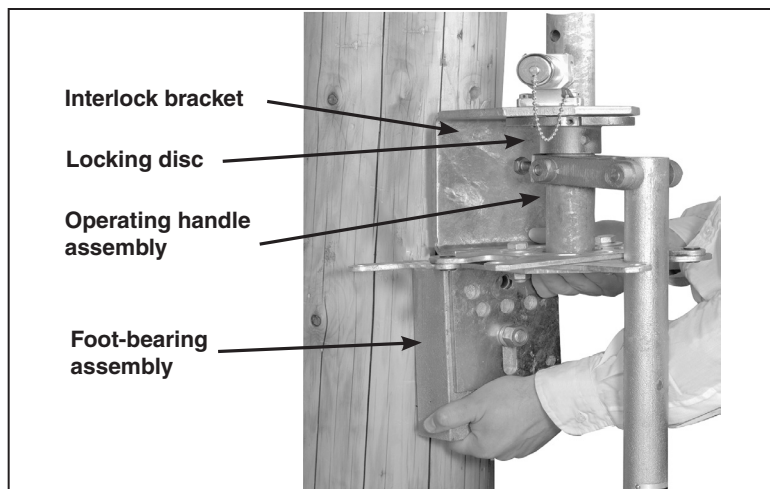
Position the interlock bracket, locking disc, operating handle assembly, and foot-bearing assembly onto the lowest vertical operating-pipe section.
